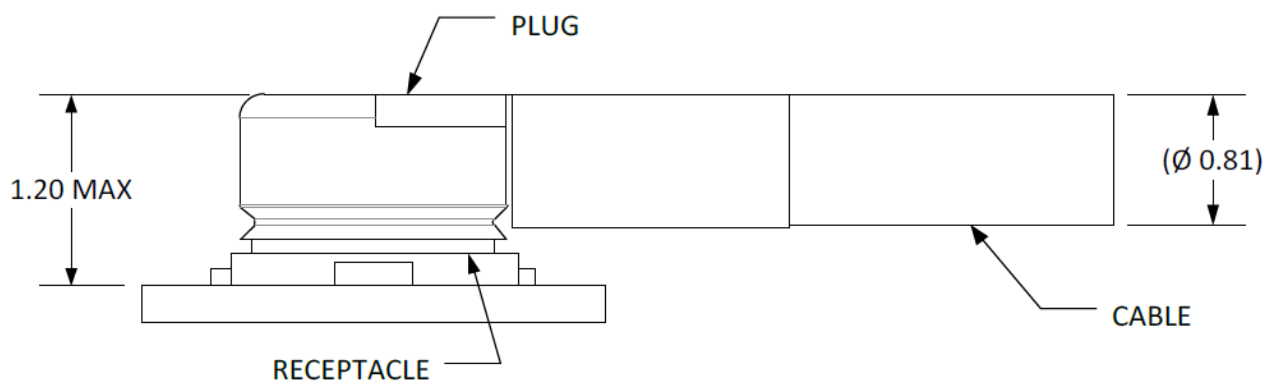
Connection Between RF Connector and Mating Plug Using $\varnothing 0.81$ mm Coaxial Cable
